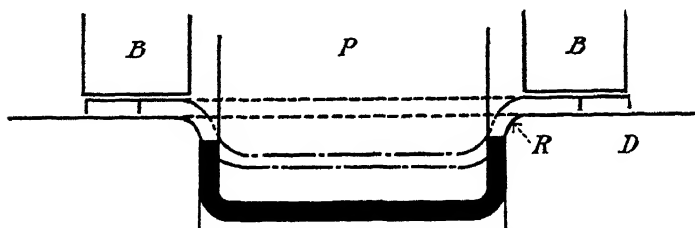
MANNER OF HOLDING BLANK IN DRUM-DRAWING OPERATION
